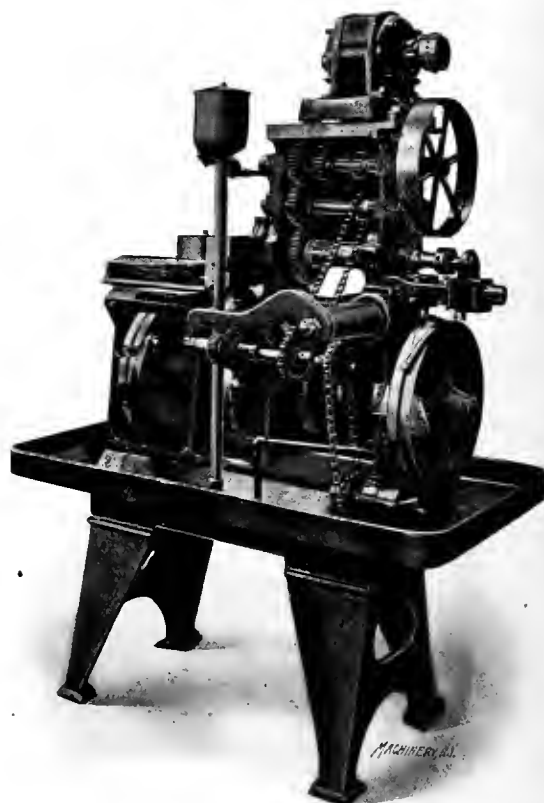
Rear View of Wells Automatic Screw Machine, showing Driving Mechanism
